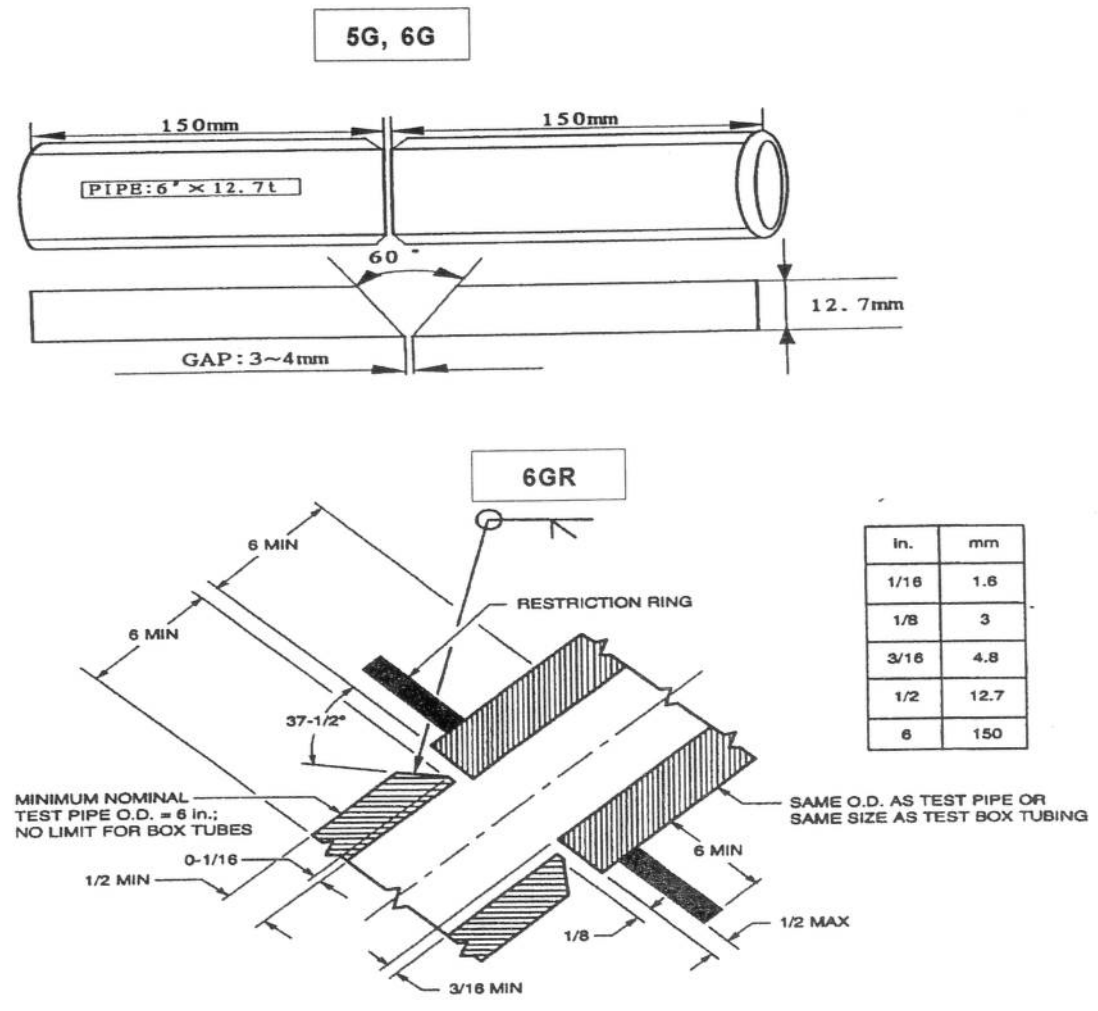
Test Joint for T-, Y-, and K-Connections without Backing on Pipe or Box Tubing - Welder and WPS Qualification (see 4.12.4.1 and 4.26)
